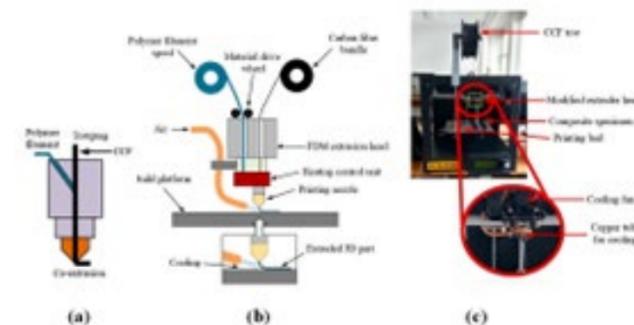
Schematic of (a) co-extrusion with the towpreg process, (b) the designed FDM 3D printer, (c) the machine used for fabricating composite structures.
